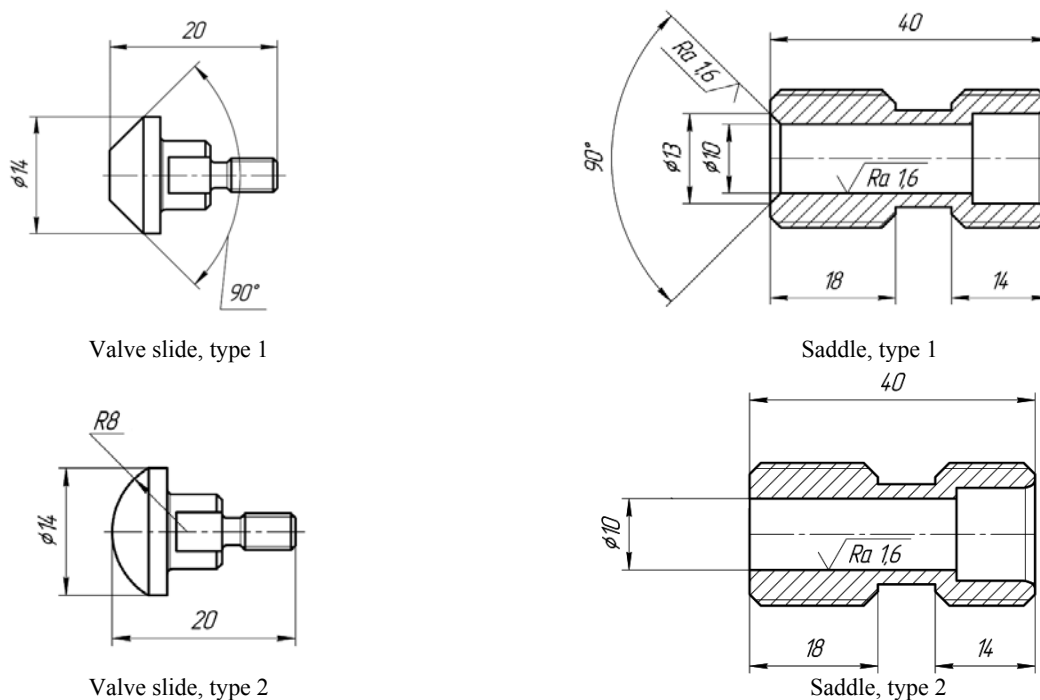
Types of used experimental sealing units of electromagnetic valve with metal-metal sealing unit
